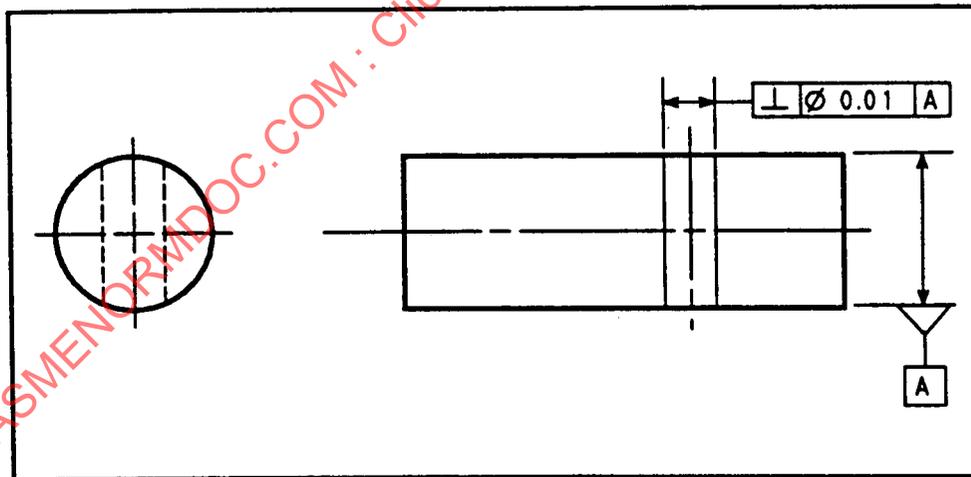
CYLINDRICAL PERPENDICULARITY OF AN AXIS; PRIMARY DATUM AXIS; NO SECONDARY DATUM SPECIFIED
